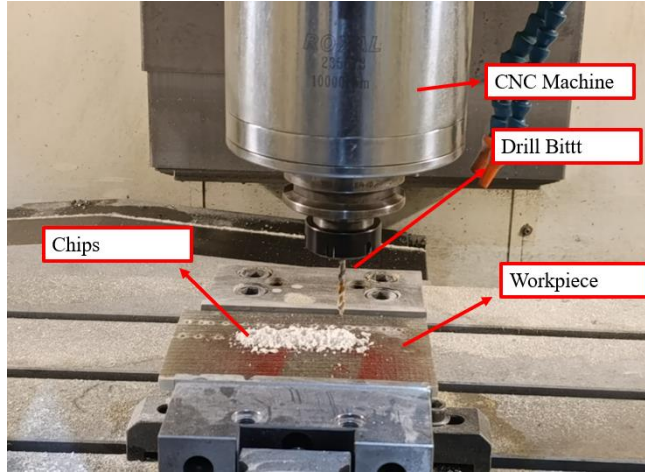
CNC Drilling Experimental Setup for GFRP Composites
